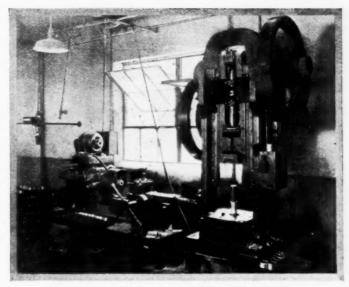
Illustrating equipment for preliminary and final finishing babbitt lining, two boring operations followed by broaching and burnishing
